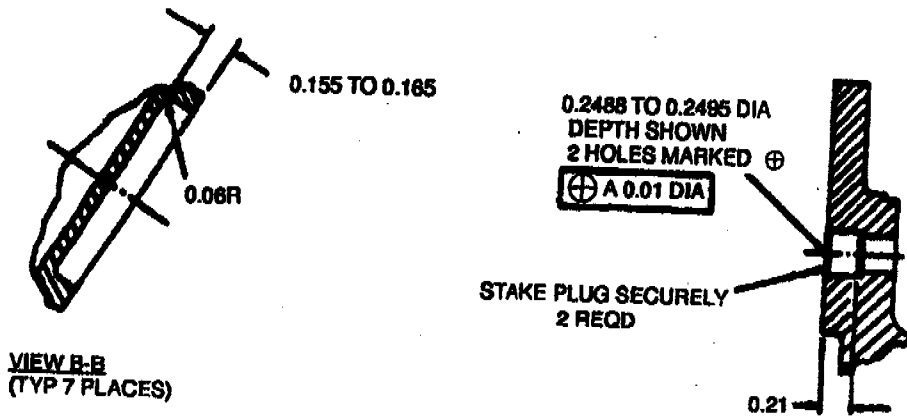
Rework of No. 2 Bearing Housing (Sheet 2 of 2) (English)
